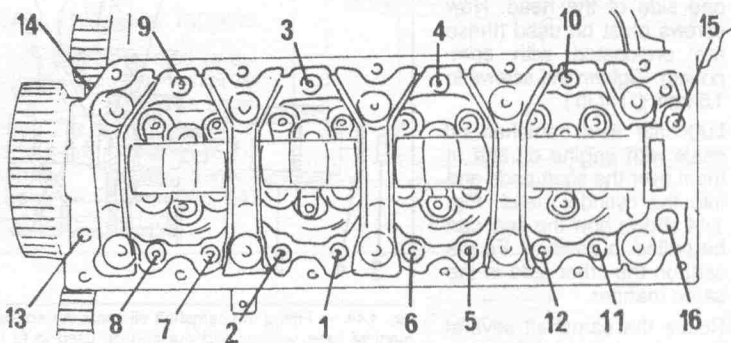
Tightening sequence for the camshaft housing bolts.
